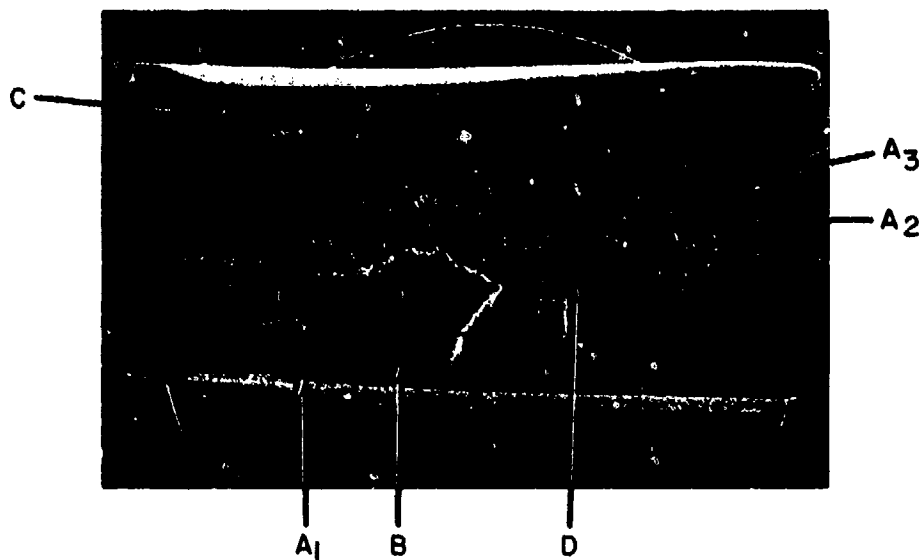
Fatigue fracture surface of a temper-embrittled A-514 weldment containing LOP, 8x.
